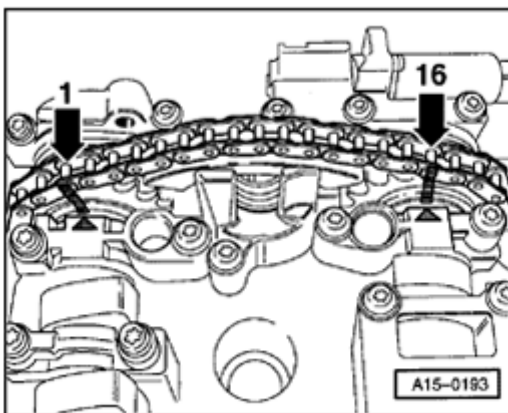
Identifying Distance Between Both Arrows Or Colored Markings Consists Of 16 Rollers Of Drive Chain
